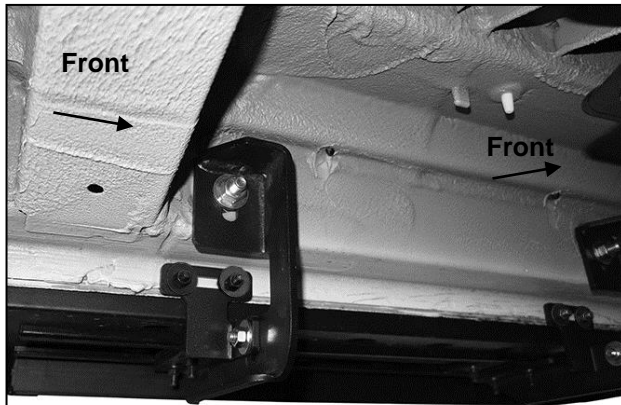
Remove rubber plugs (driver/left side location pictured)
